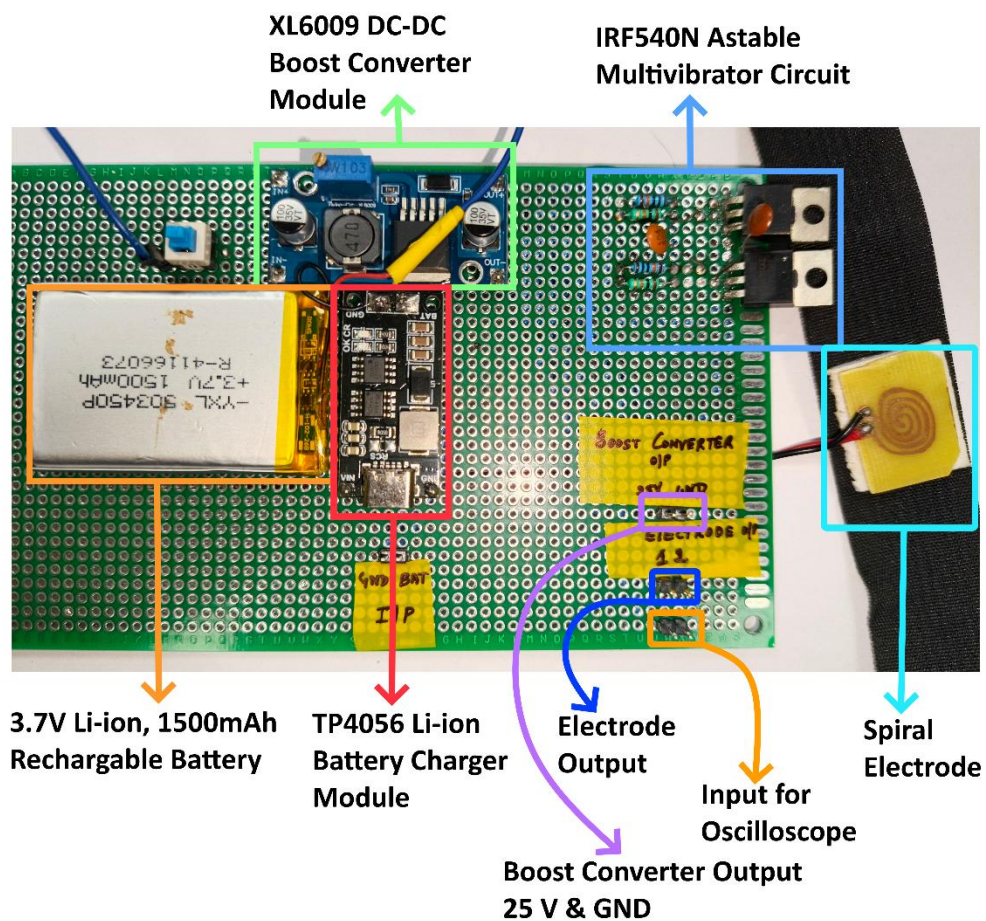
Implementation of Final Prototype soldered on Zero PCB.
